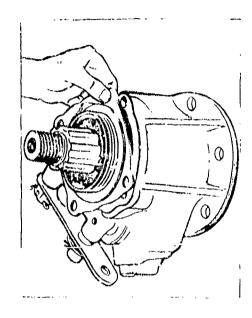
Adjustment of tension on the front axle power shaft bearings
